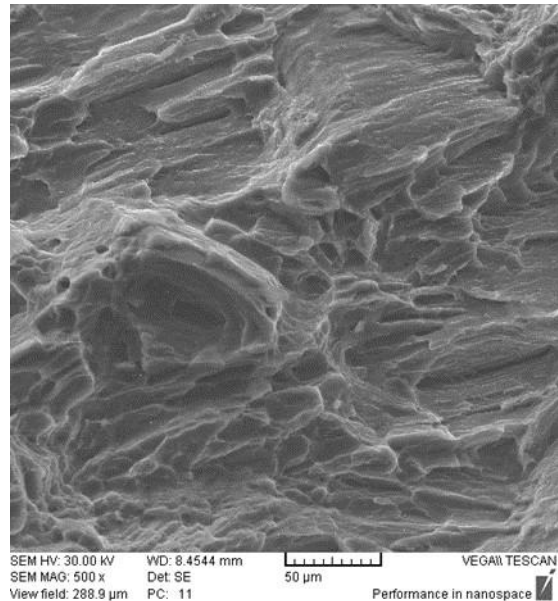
Tensile fracture surfaces of initial sample Mg AZ31
